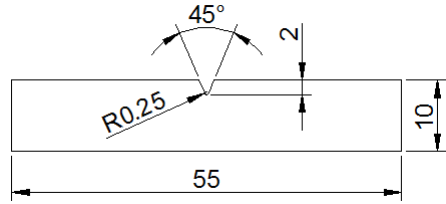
Dimensions of the V-notch Charpy impact test specimen(unit: mm)
